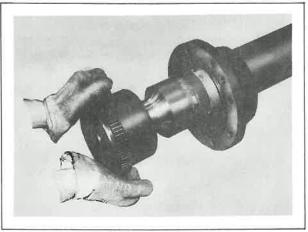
APPLYING HEATED COUPLING HUB TO COMPRESSOR DRIVESHAFT.
